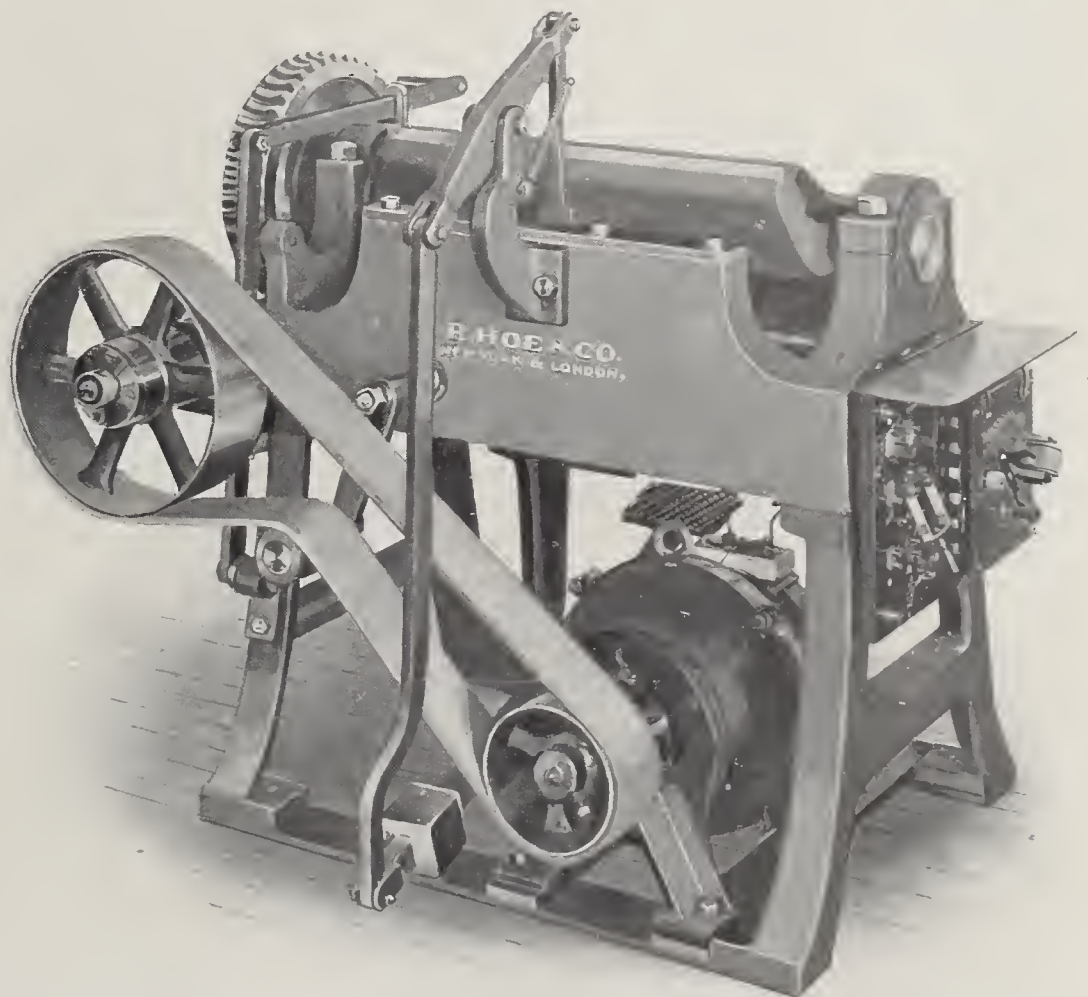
A SHAVING MACHINE FOR STEREOTYPE PLATES, DRIVEN BY A SPRAGUE MOTOR
